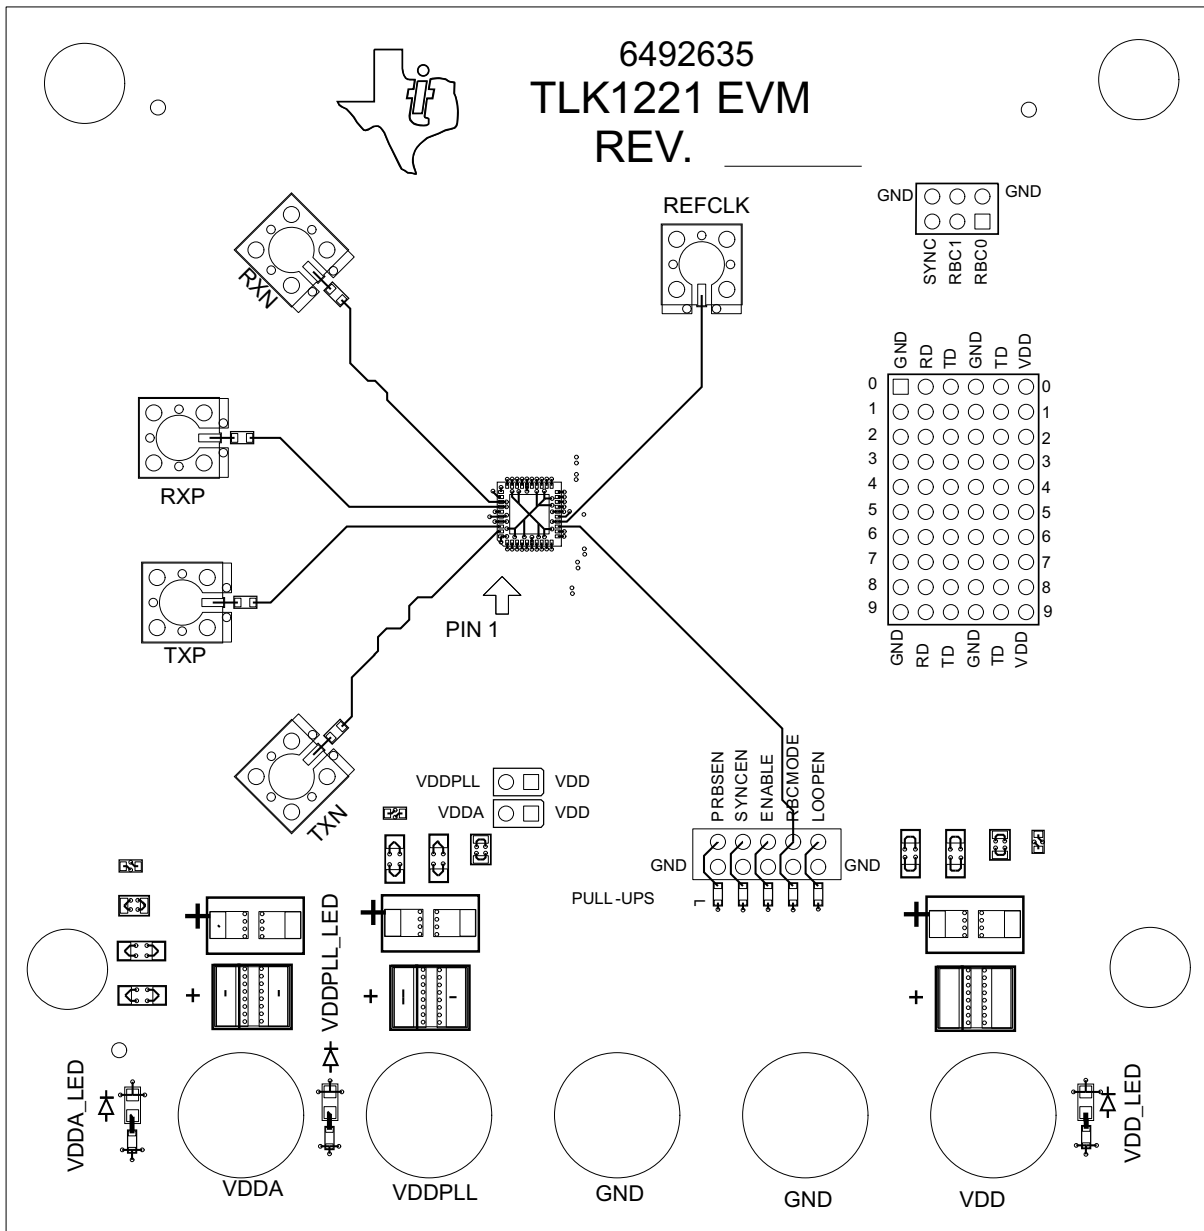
TLK1221 Board Layout: Top (Layer 1)
